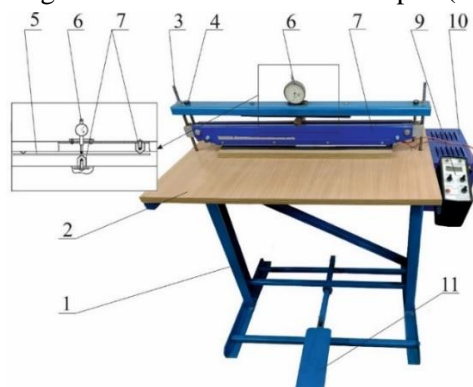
General view of the installation for researching the welding parameters of film materials
